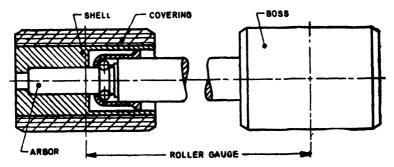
A TYPICAL FIXED BOSS TYPE ROLLER
